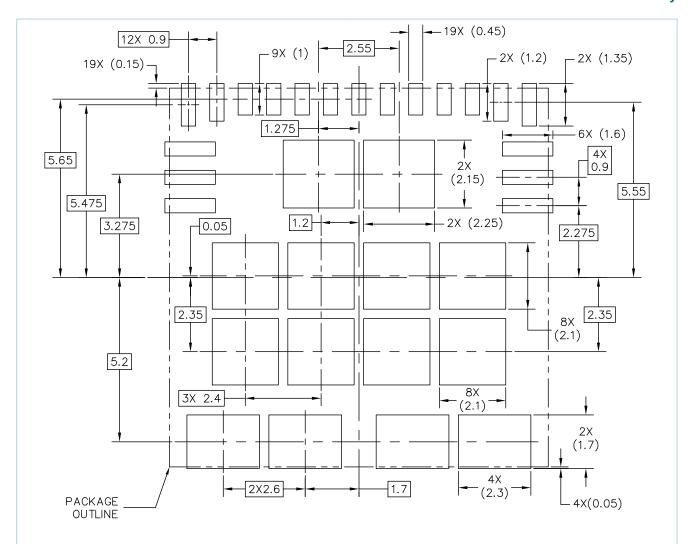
Package outline dt5 HQFN23 (SOT1631-4)
